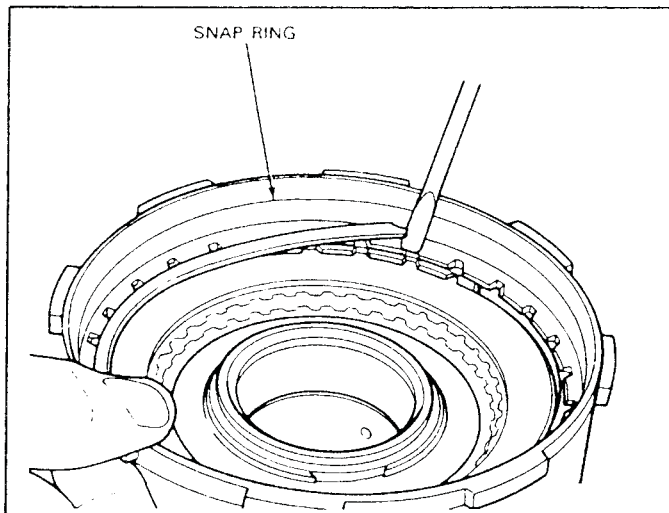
Removing or Installing Reverse-High Clutch Pressure Plate Snap Ring
